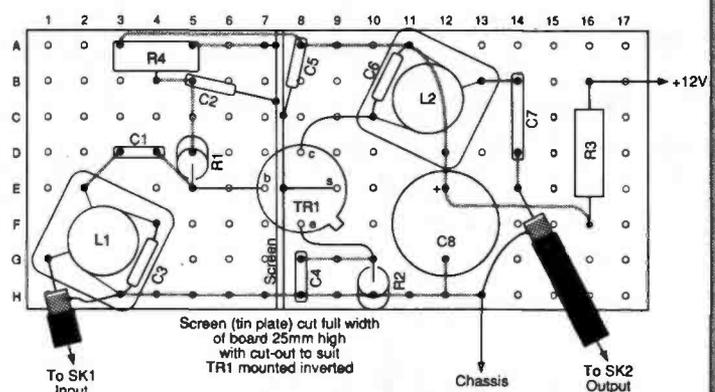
The overlay built on 0.1in. perforated matrix board.
